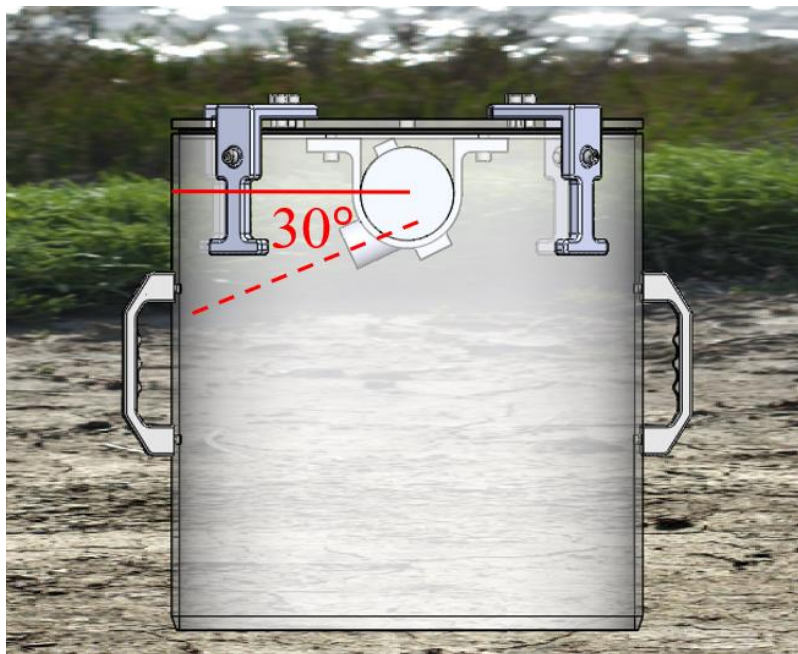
The pump mount, as well as the pump, was shown in a Solidworks CAD design.
